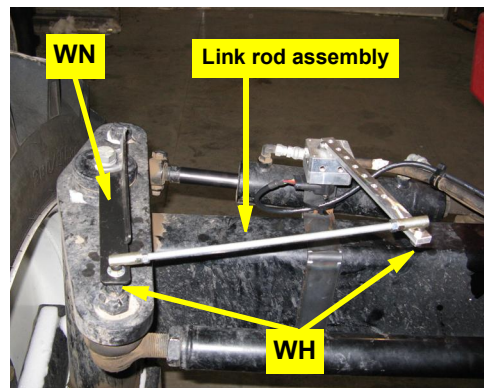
Installed WAS link rod bracket. (You will connect the WAS cable at step 2d in the ECU installation section.)
